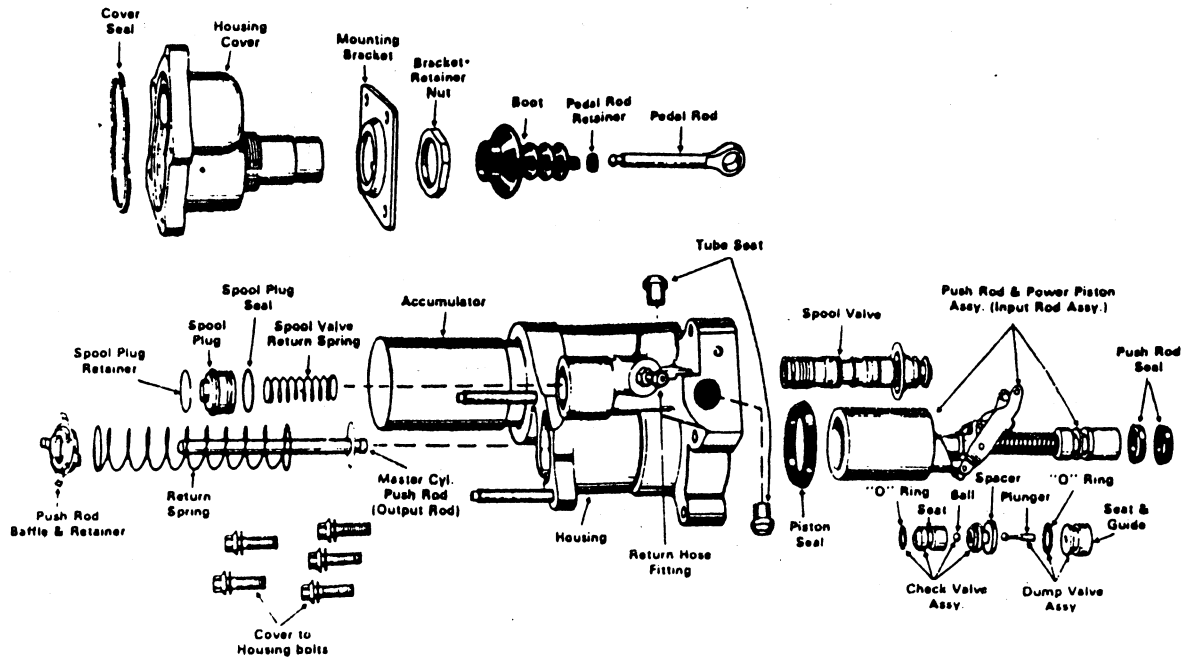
EXPLODED VIEW OF HYDRO-BOOST
